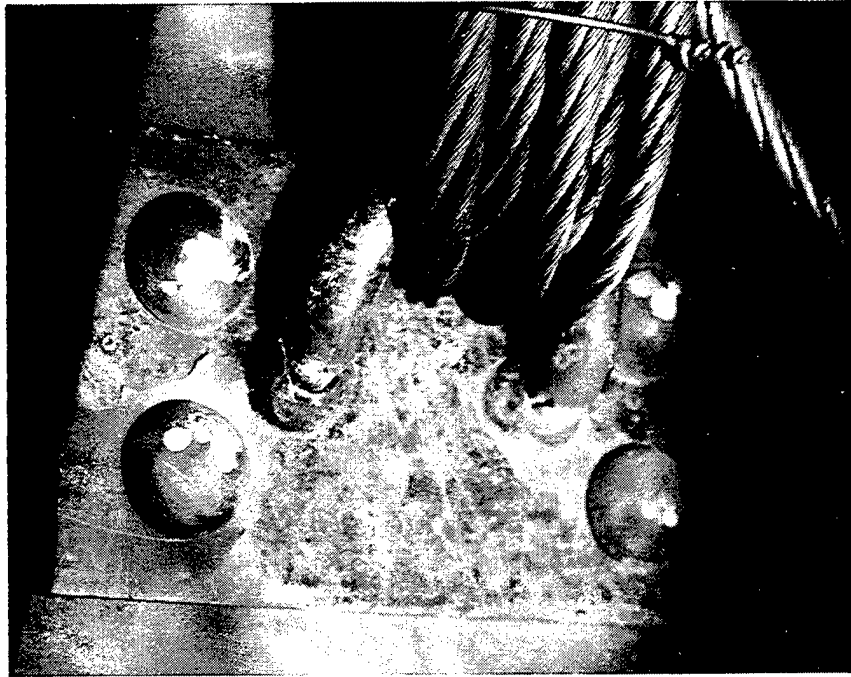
Enlarged view of the failed tie-down device in Figure 42. Note that the failure occurred in the upper toe of both welds.
